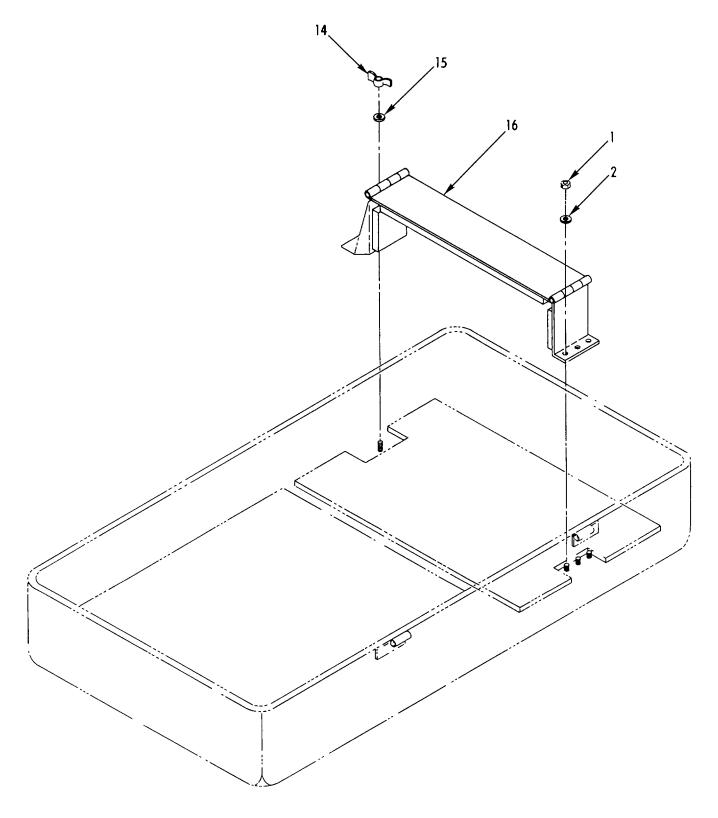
CASE ASSEMBLY (SHEET 2 OF 2)
